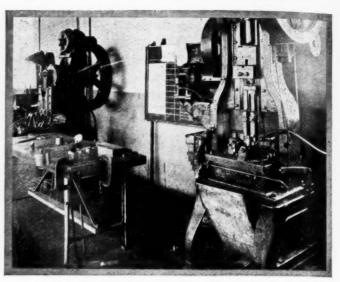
Press set-up for broaching shim faces of each shell. At left, gaying fixture which amplifies by measuring around periphery
